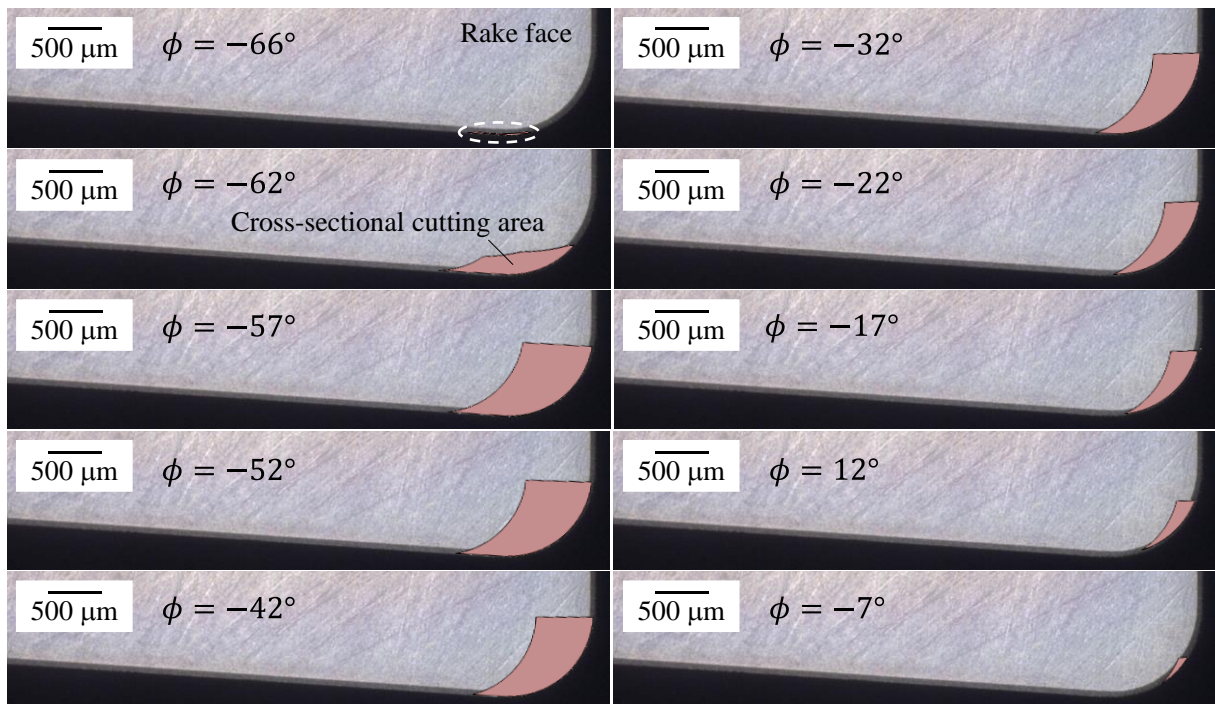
Variation of the cutting position in tool axis offset 6 mm.
